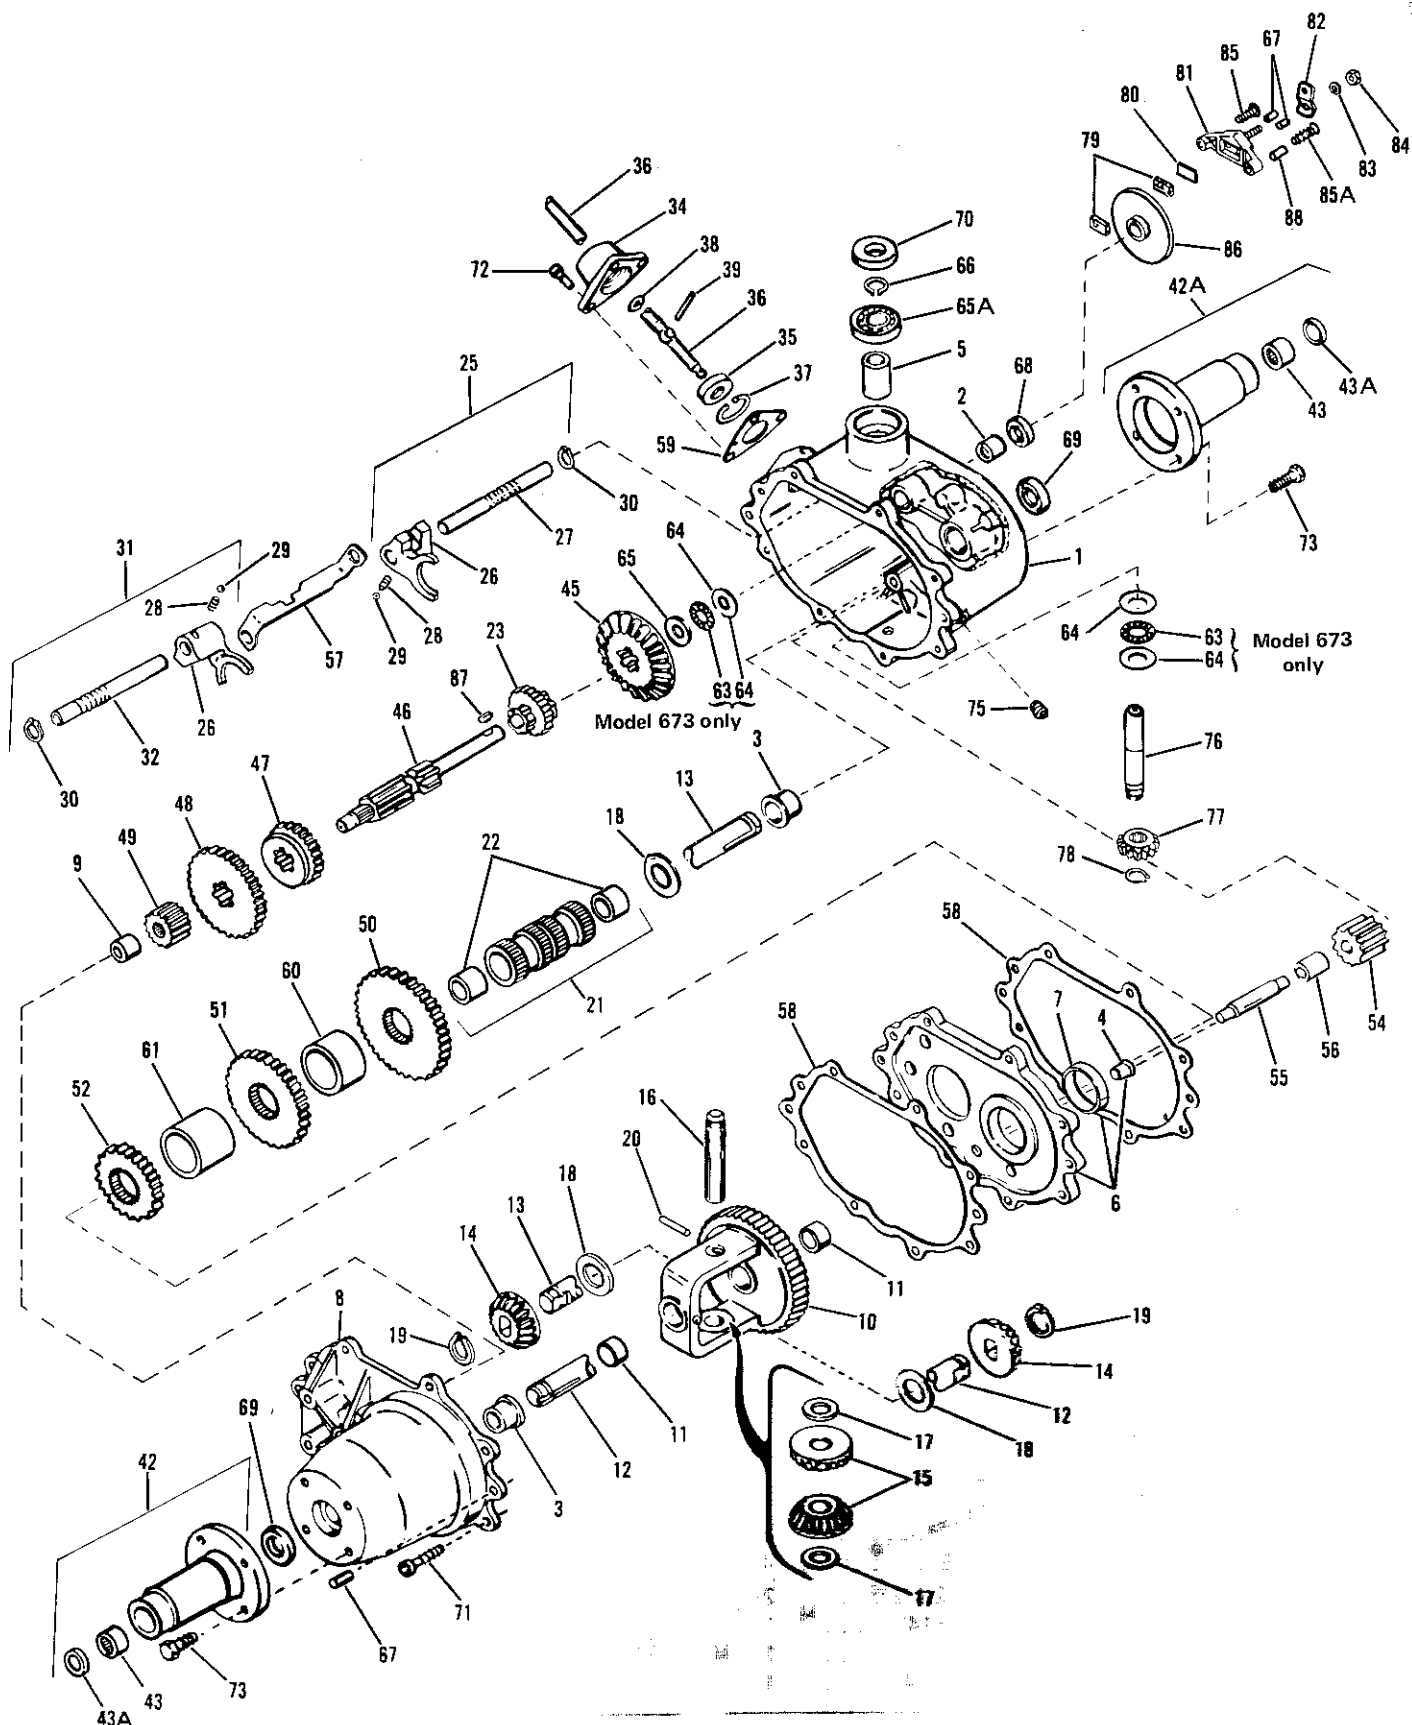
PEERLESS TRANSAXLE ASSEMBLY (MODEL 673)
